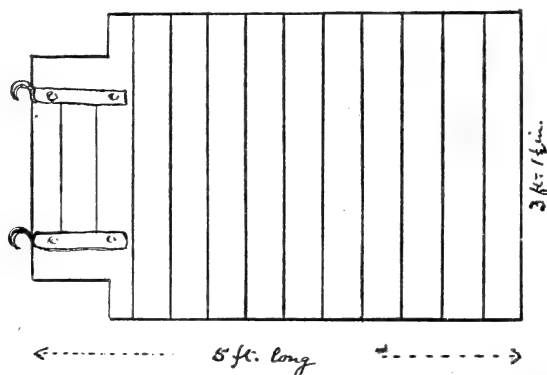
Board to hook on over shafts for sheep to walk down. This is made of 1-in. boards, with two battens 6 in. \times 2 in. underneath. The cross-slips are 1 in. \times $\frac{1}{2}$ in., about 4 in. apart.
